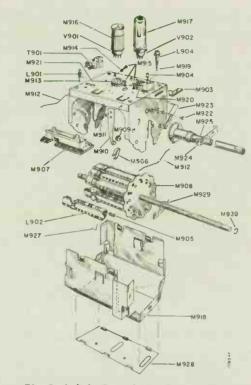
Exploded View of VHF Tuners 94D151-1 and -2 used in early 16J1, 16K1, 16R1CB and 1651CB Chassis.
